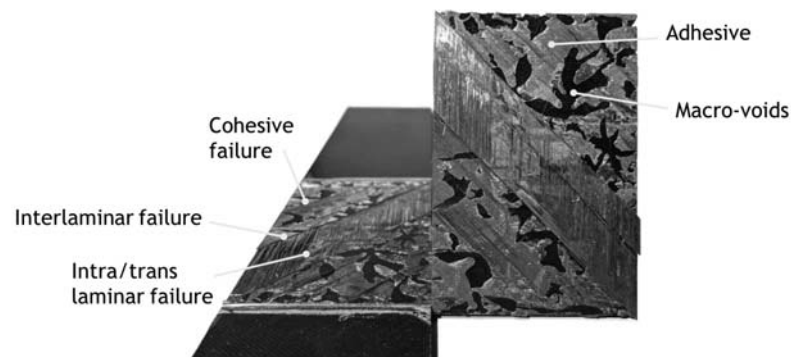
Typical fracture surface of the untreated specimens.
